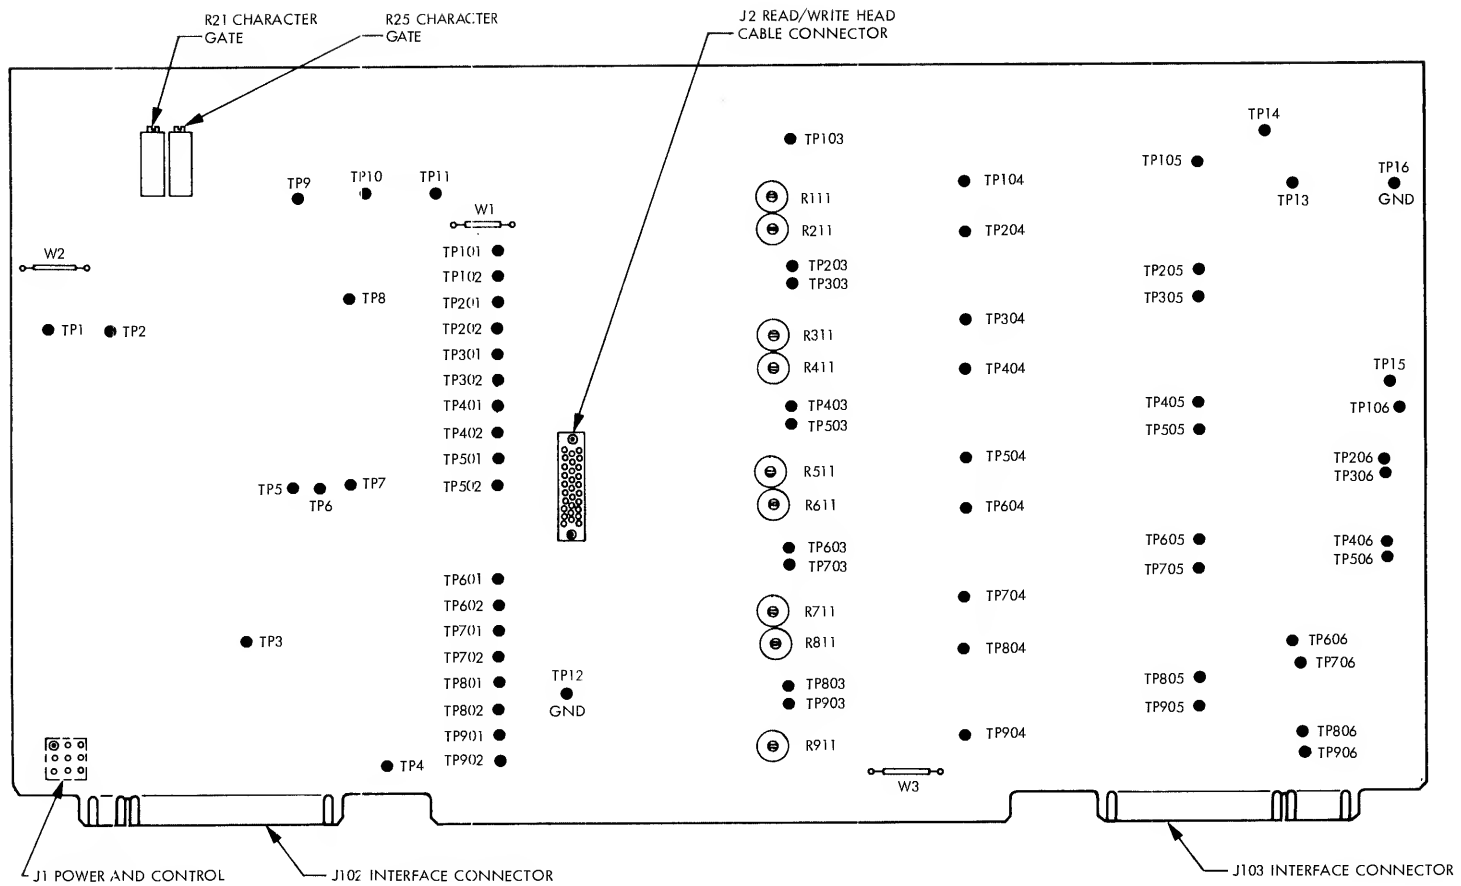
Data D PCBA, Test Point and Connector Placement
